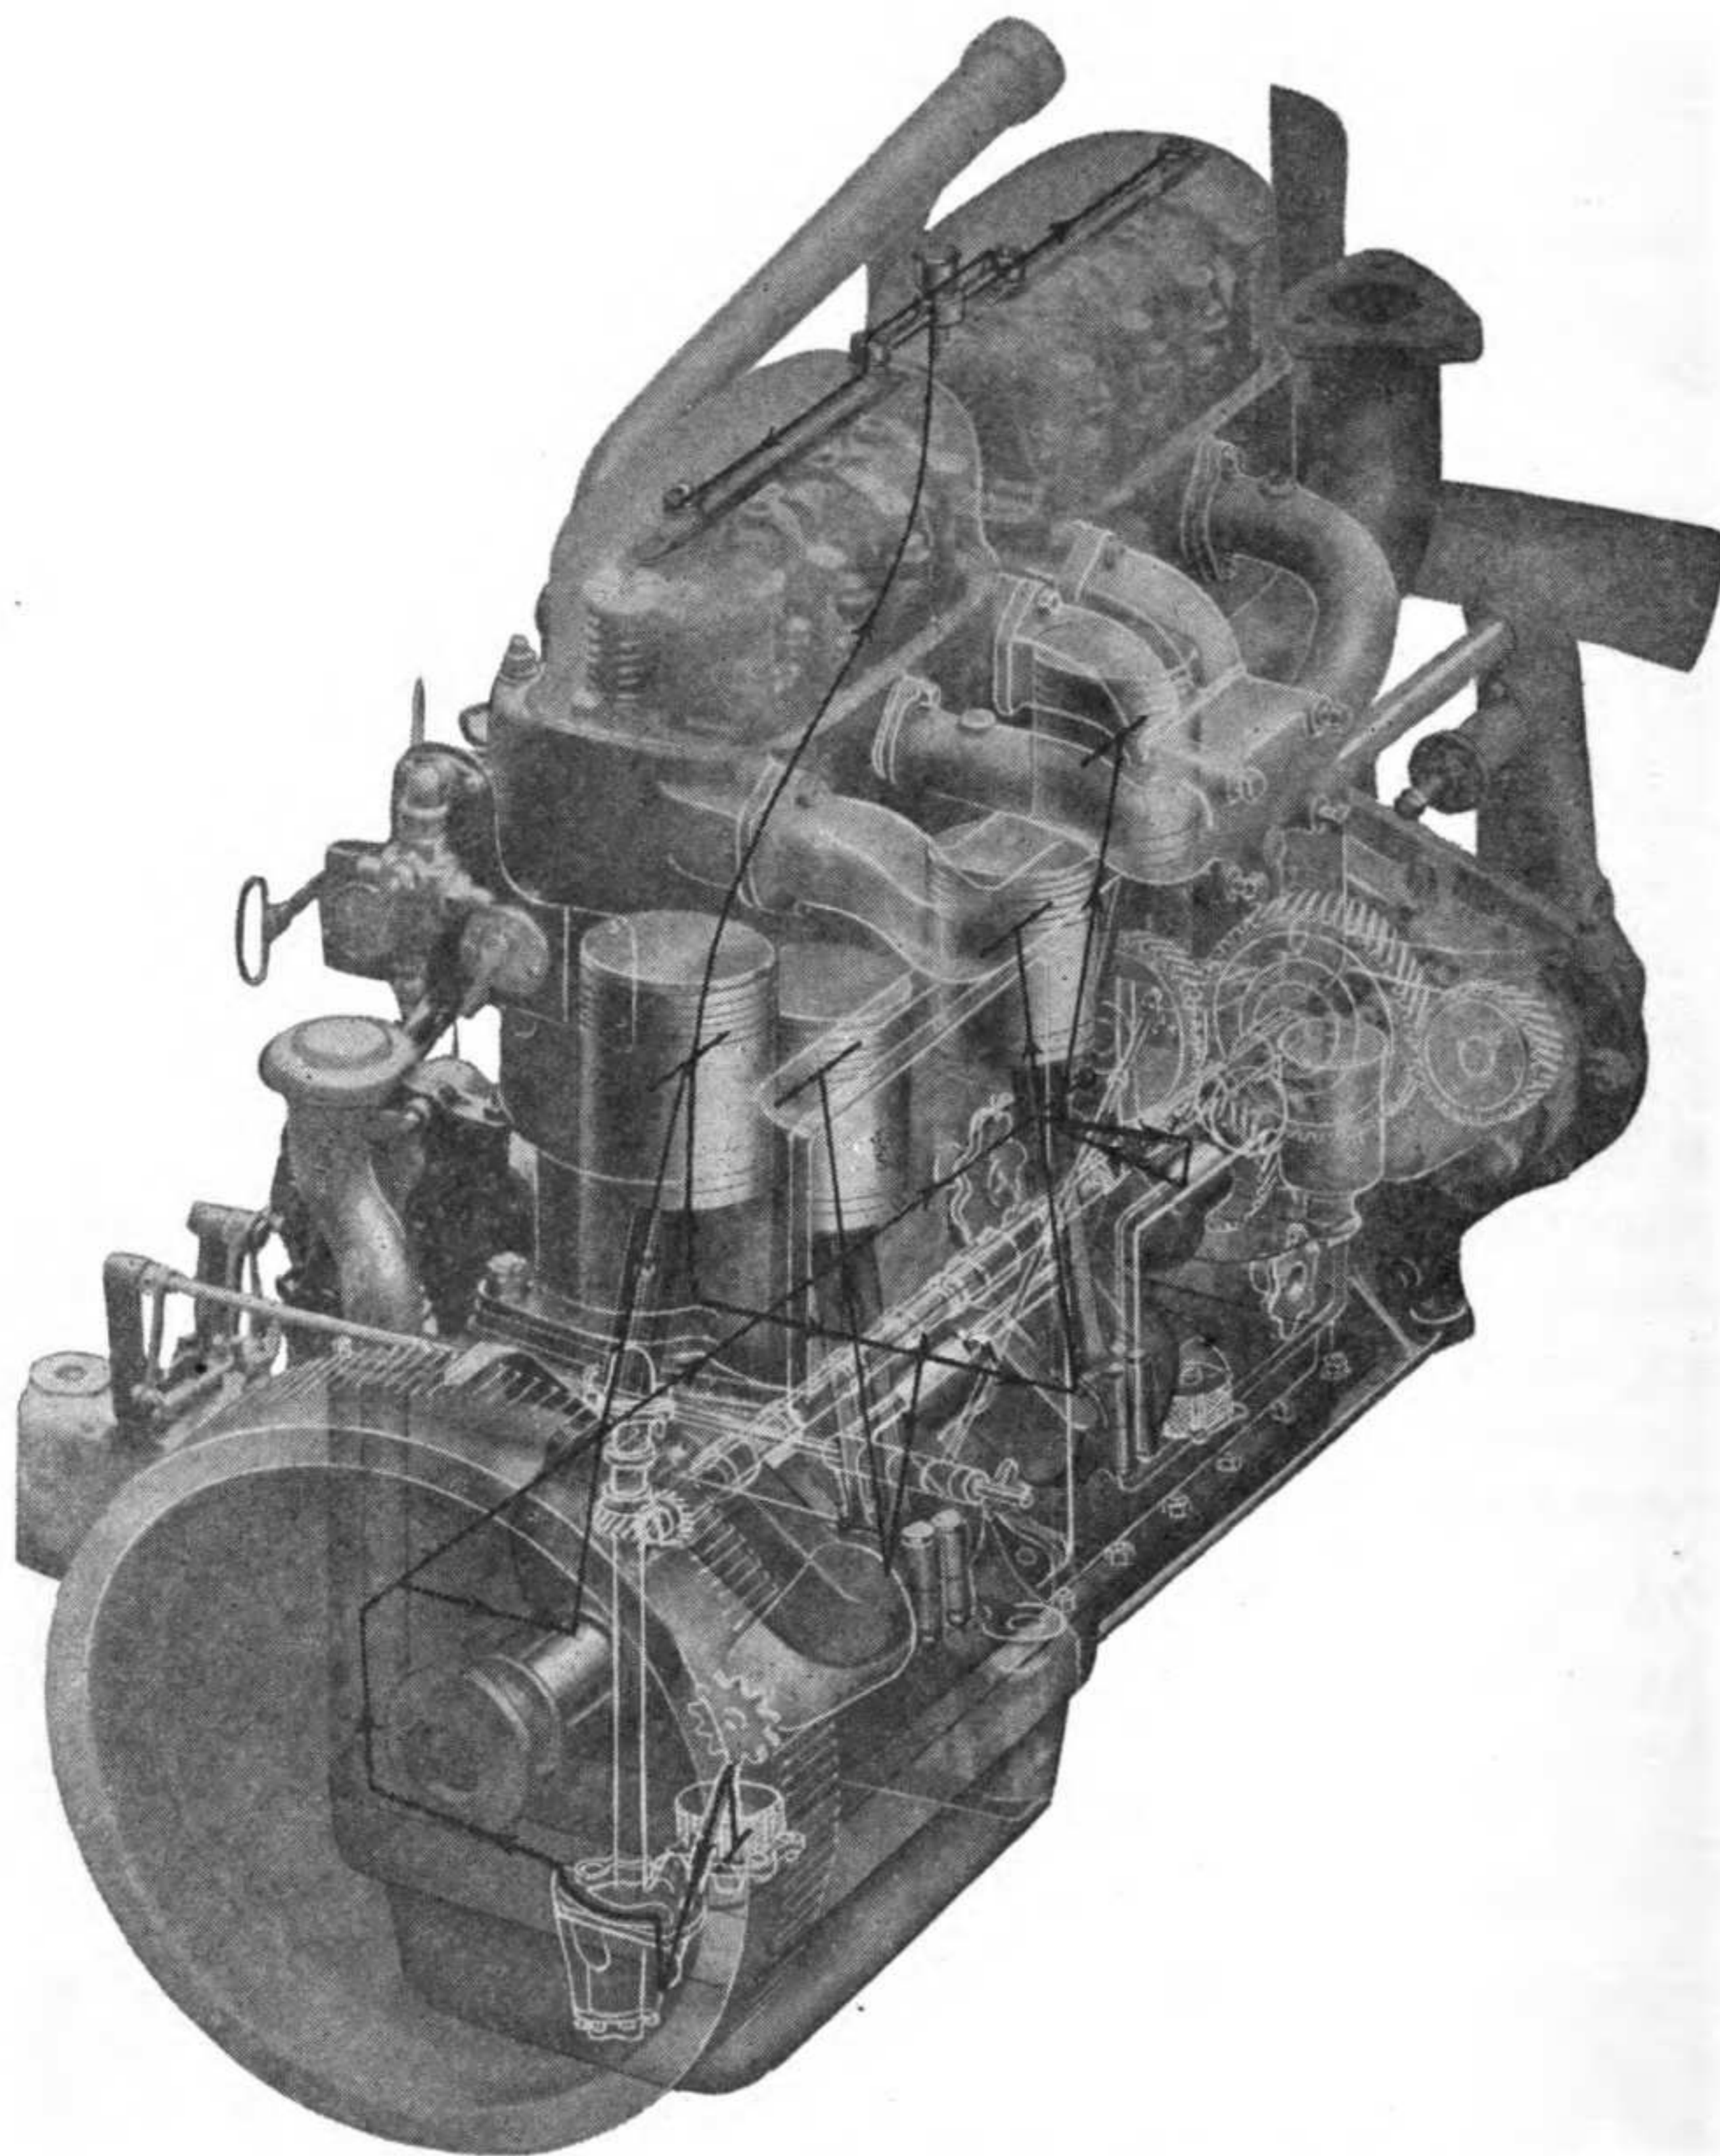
PHANTOM DRAWING OF ENGINE OILING SYSTEM
